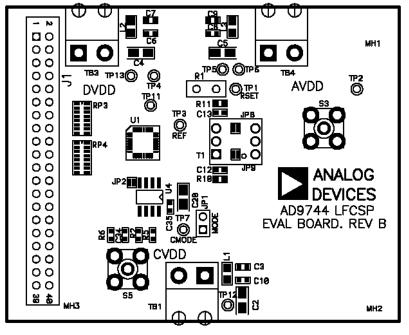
AD9740ACP-PCBZ/AD9742ACP-PCBZ/AD9744ACP-PCBZ/AD9748ACP-PCBZ LFCSP Evaluation Board Layout Assembly—Primary Side
